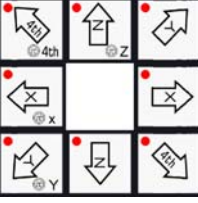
GSK218MC-U1 Machine tool control area
